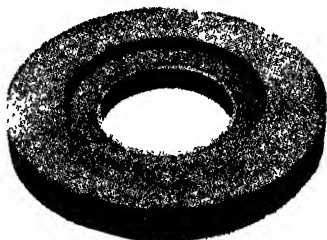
Type No. 7, straight but recessed on both sides.
